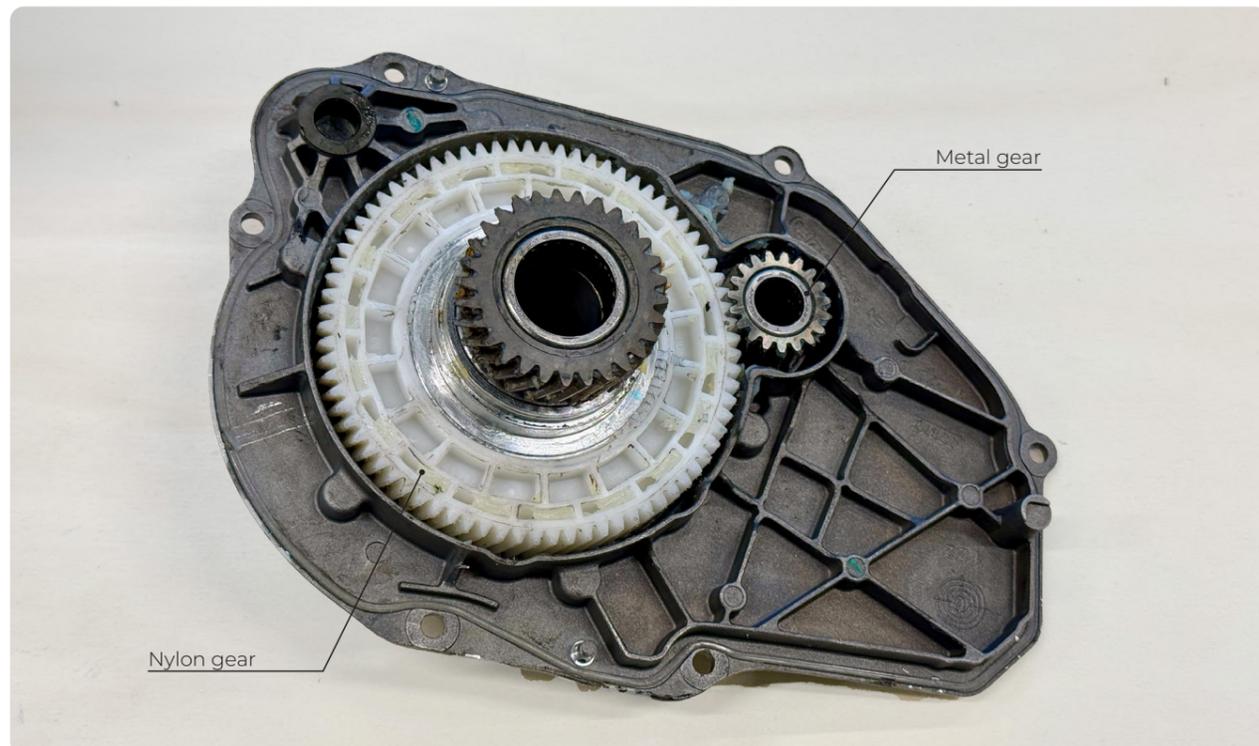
Both metal and nylon gears from the Bosch BDU 250
